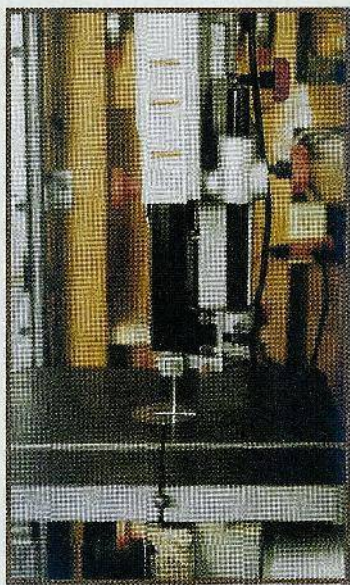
The band saw armed with a 1/16" or a 1/8" skip-toothed blade provides the means to quickly cut larger and harder pieces of wood more efficiently
